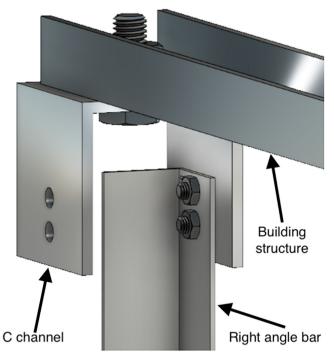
CAD model of the assembly that includes the C channel and angle bar.
